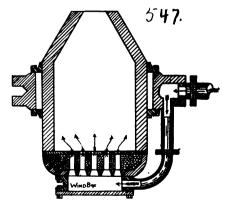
SECTIONAL VIEW OF A BESSEMER CONVERTER
